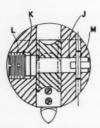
Drawing illustrating method of applying tension to the tool holder.
